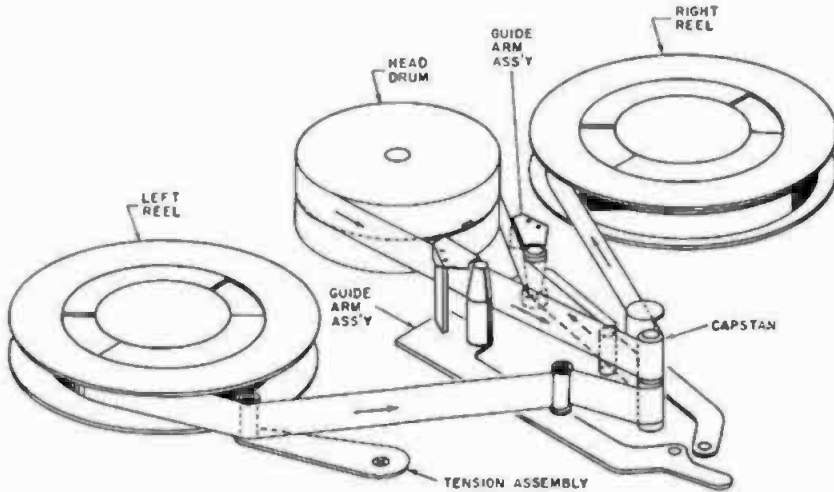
G. Tape-threading path for a spiral type transport system, as viewed from the front.
